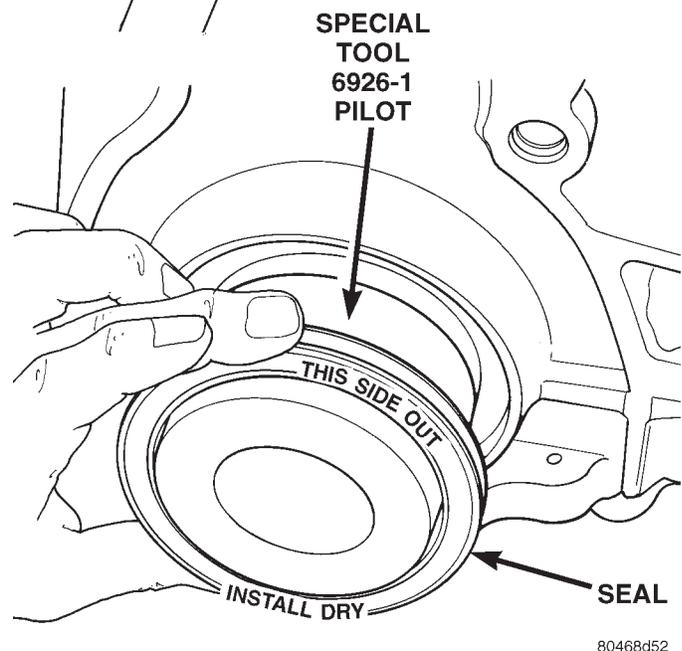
Rear Crankshaft Seal and Special Tool 6926-1
